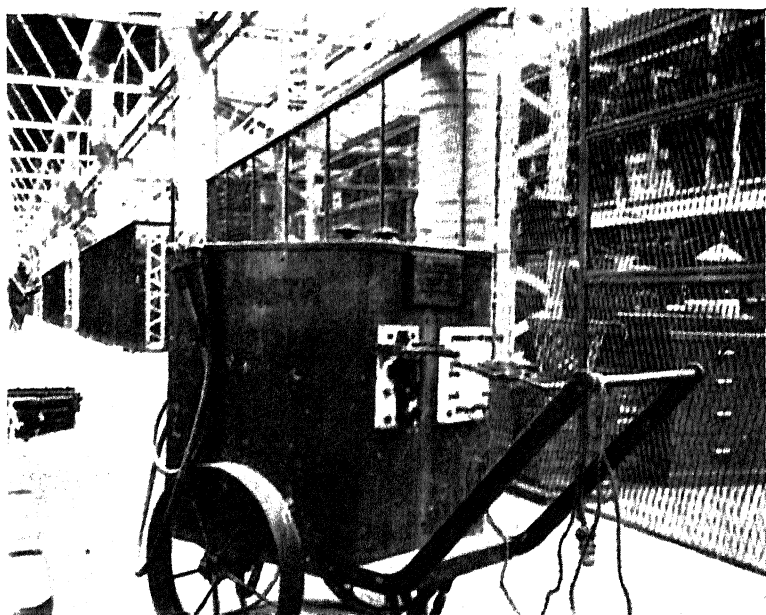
Transportable Transformer and Switches for Testing the Insulation of Apparatus during manufacture.
